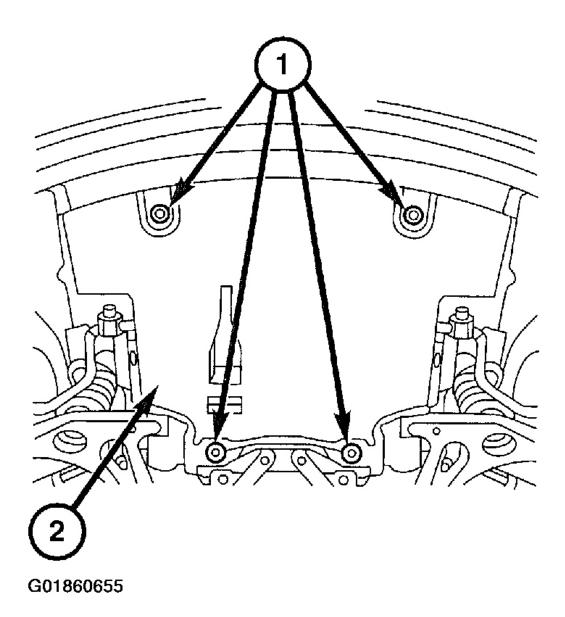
Removing Lower Splash Shield Screws & Shield Courtesy of DAIMLERCHRYSLER CORP.
